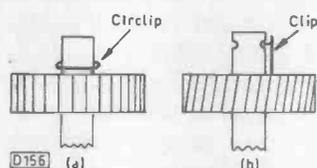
Difference between the type of gear used in the G mechanism (a) and the helical gears used in the K mechanism (b).
